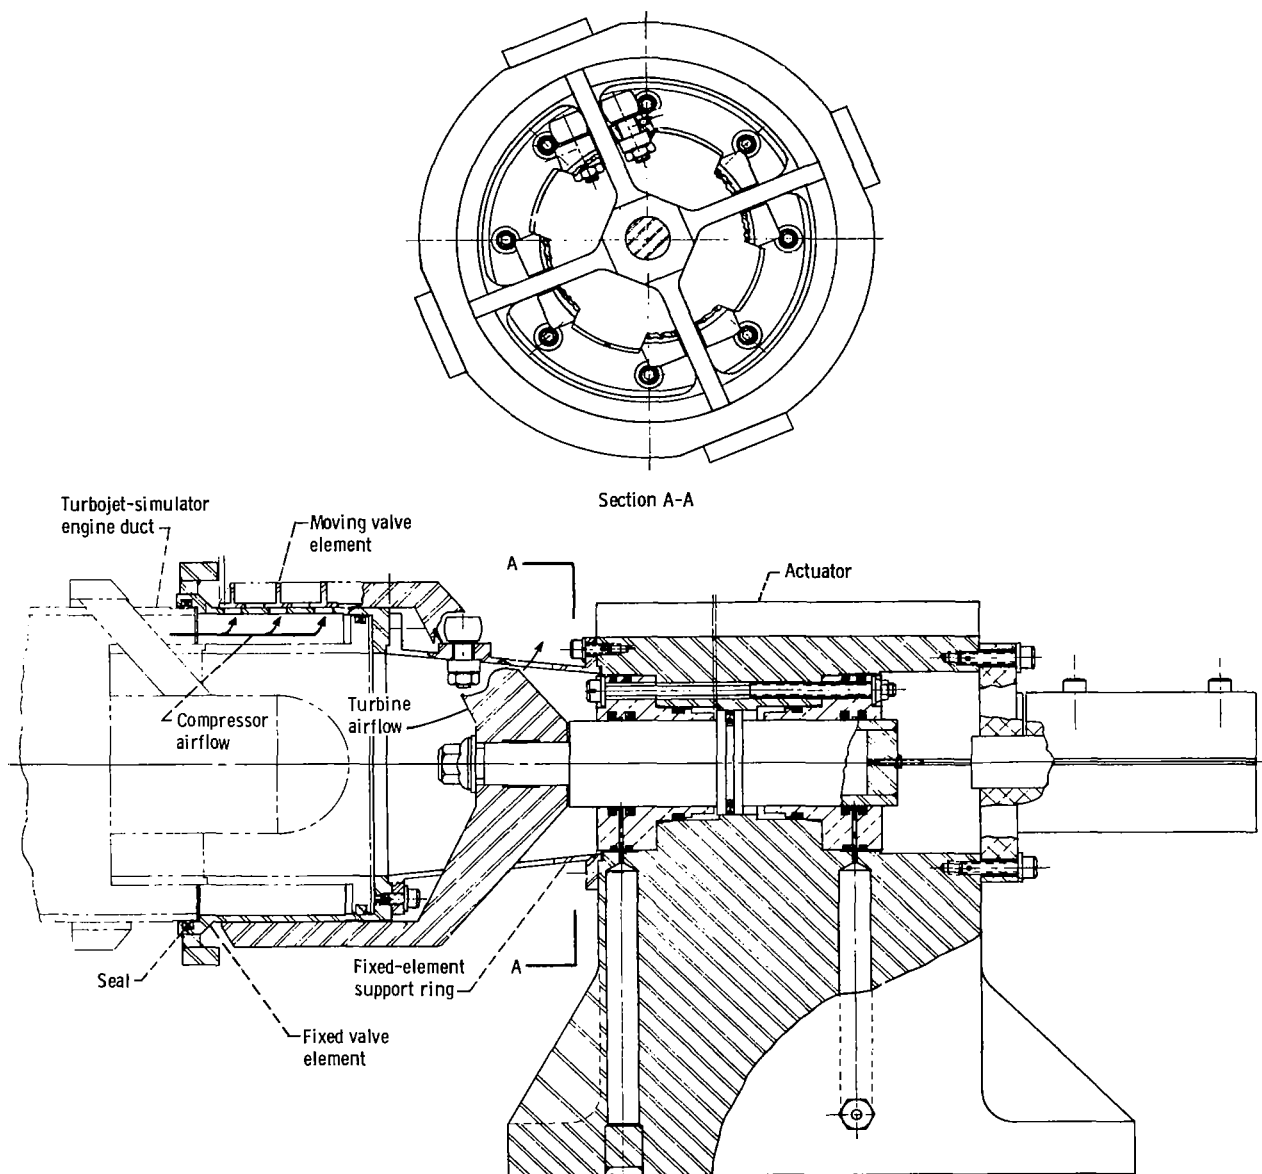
Actuator and airflow-valve assembly. (Valve shown in closed position.)
